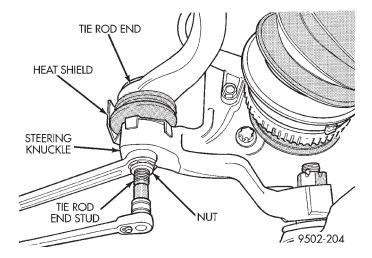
Removing Tie Rod End Attaching Nut socket while loosening and removing nut with wrench (Fig. 36).
